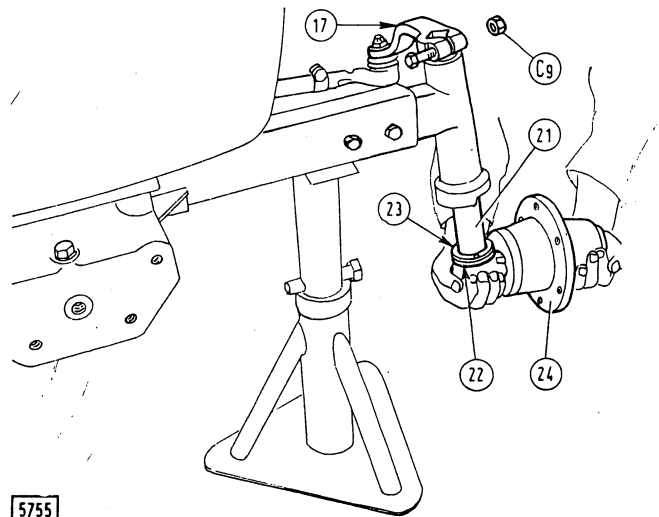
Fitting (removing) the steering spindle (21) complete with wheel hub (24).
